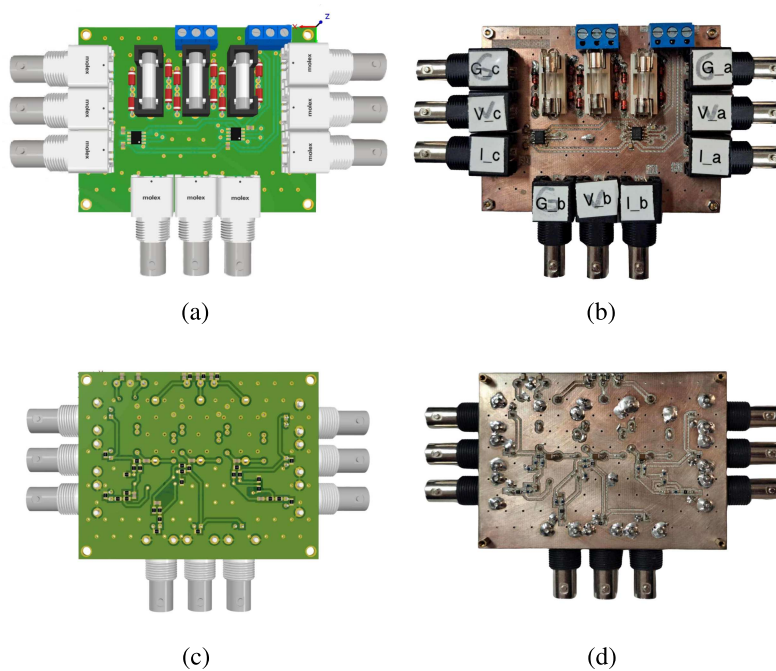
Top and bottom views of the 3D design and prototype of the SCU (dimension 90×70 mm). (a) Top layer view of the 3D design. (b) Top layer view of the prototype. (c) Bottom layer view of the 3D design. (d) Bottom layer view of the prototype.
